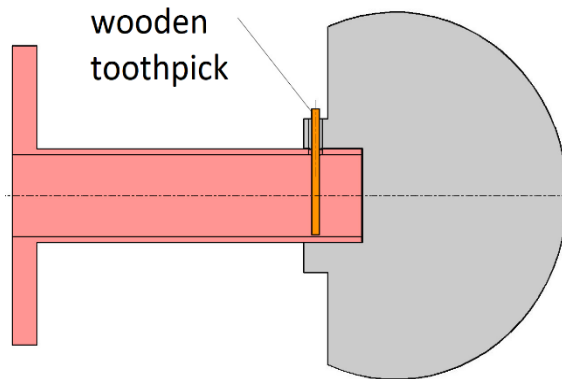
The attachment mechanism using a wooden toothpick [46]
